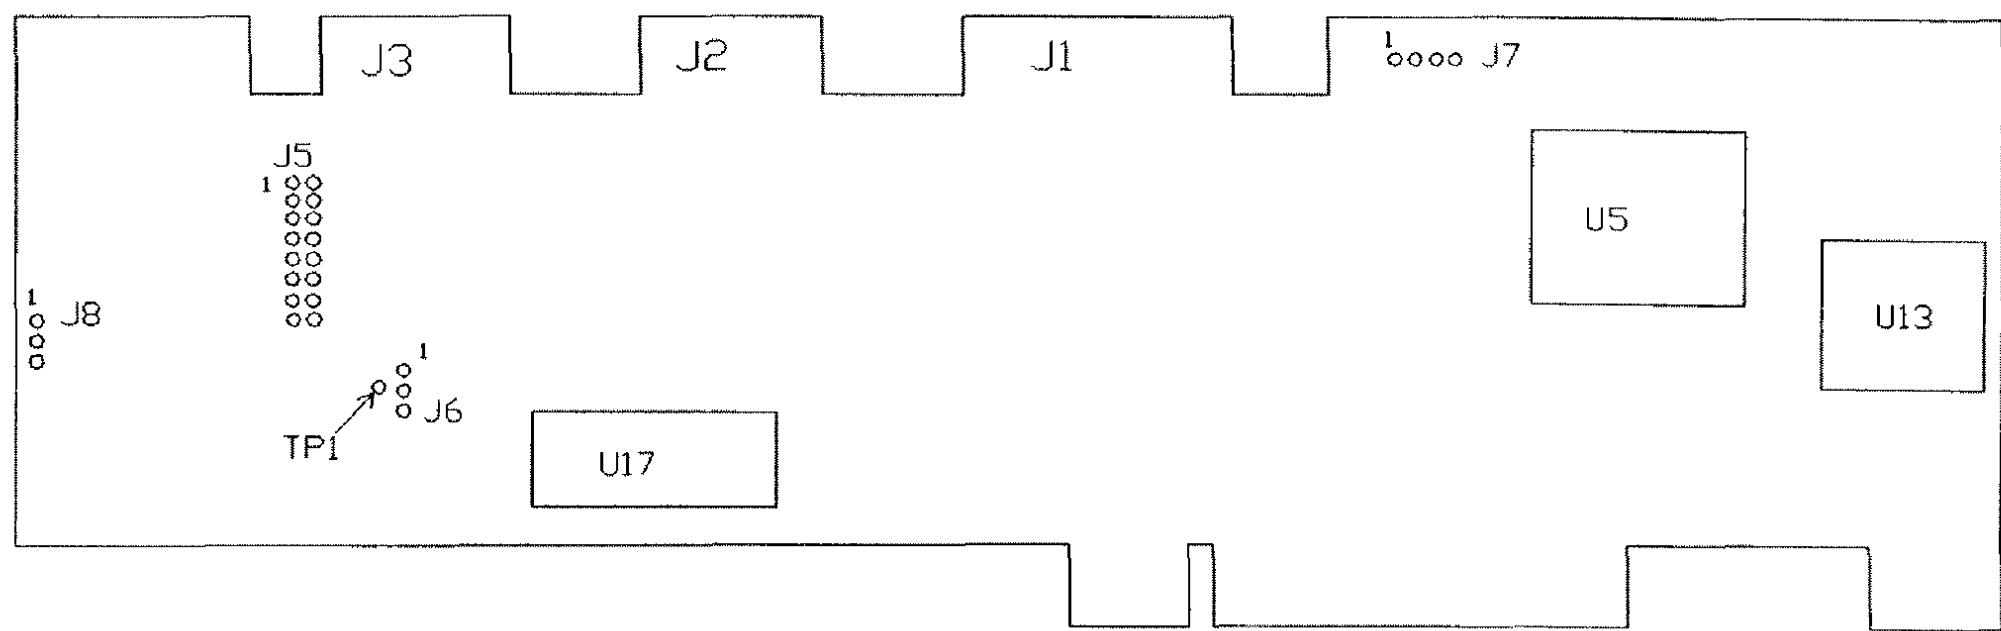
Adaptec ST506 Hard Drive Controller For Tandy 5000MC
